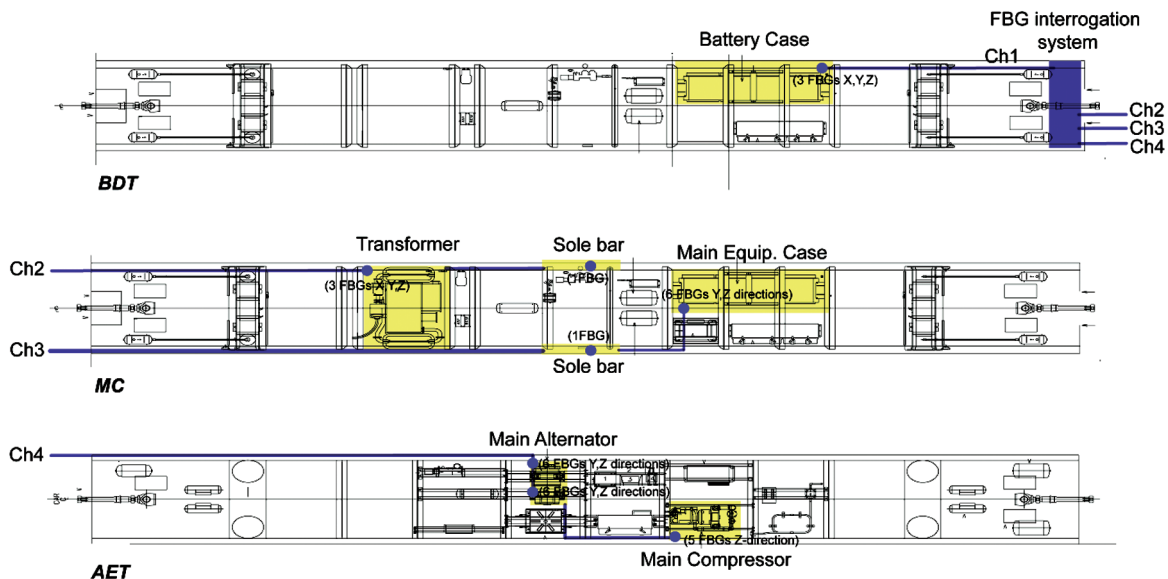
Locations of weld joints where FBG sensors are installed for monitoring the dynamic strain of the joints where heavy critical under-frame equipment are mounted. BDT = Battery Trailer, MC = Motor Car, AET = Auxiliary Equipment Trailer [38].
